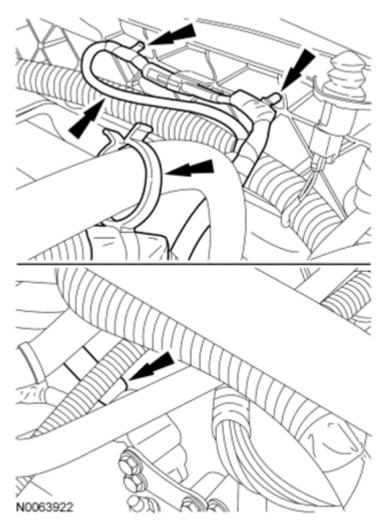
Locating A/C Pressure Tube Bracket Bolt Courtesy of FORD MOTOR CO.
